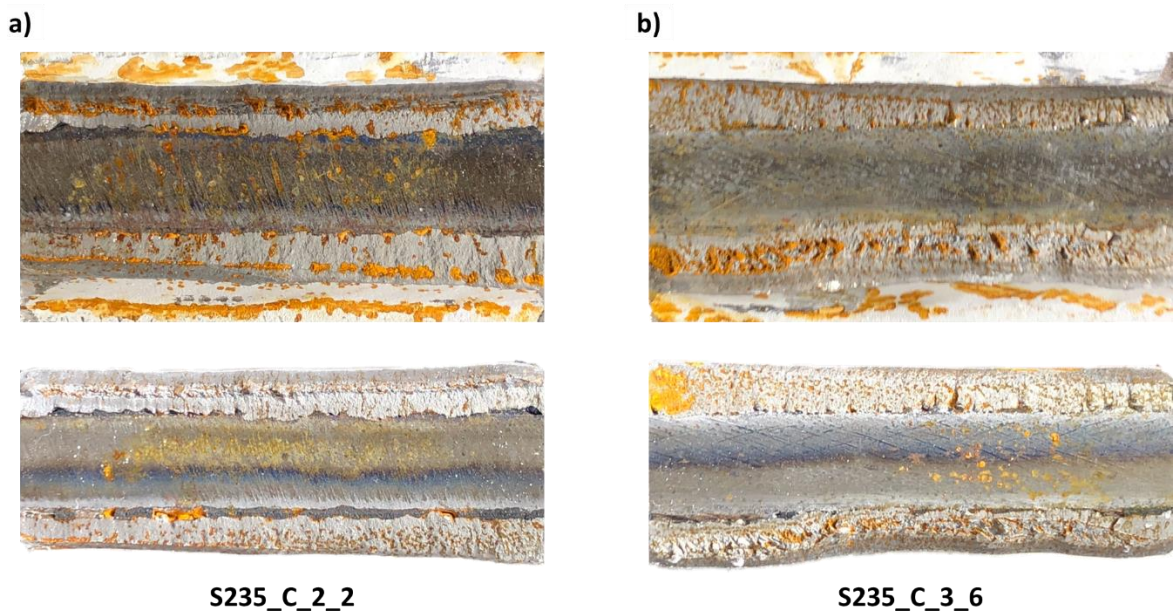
Fracture surfaces of two C-joint specimens with presumed break below the FTT
